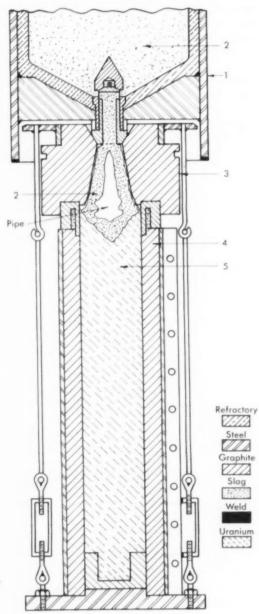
Scheme for Casting Uranium Ingot Directly After Reduction in Bomb With Specially Designed Bottom
